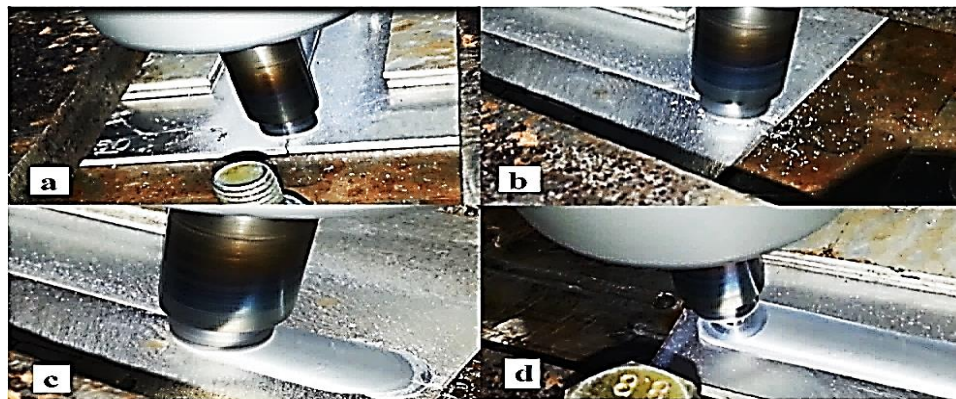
The welding steps, (a) Plunging step (b) tool penetration (c) stirring and welding step (d) end of welding.
